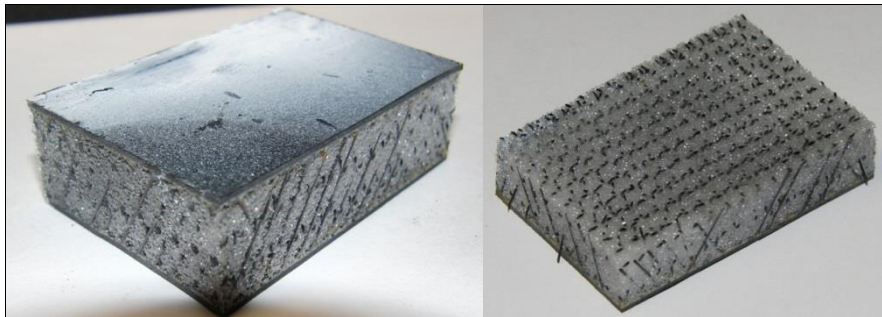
A Z-pinned sandwich specimen (left) as received, (right) with top face sheet removed
